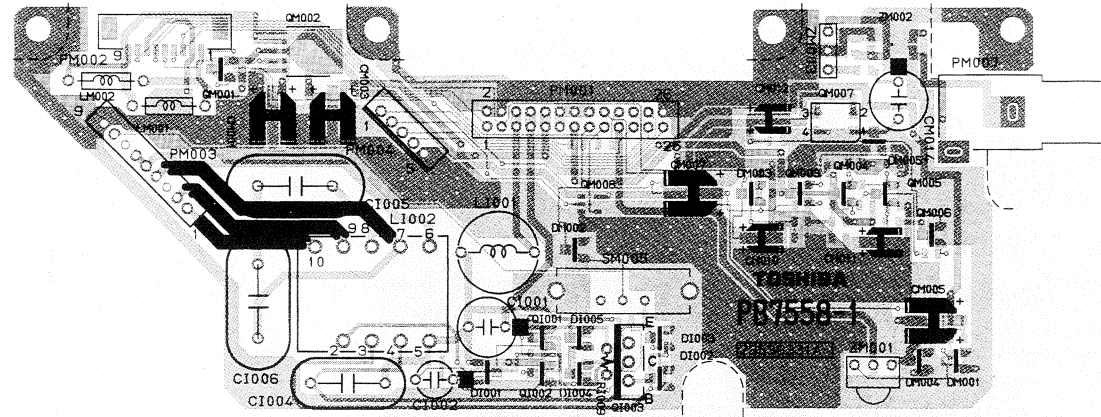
U0041 Inverter PC Board (Top Side)
